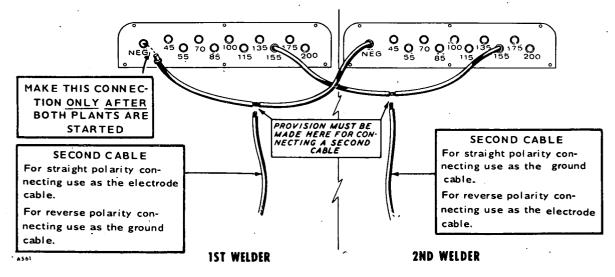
CONNECTIONS FOR WELDING IN PARALLEL
